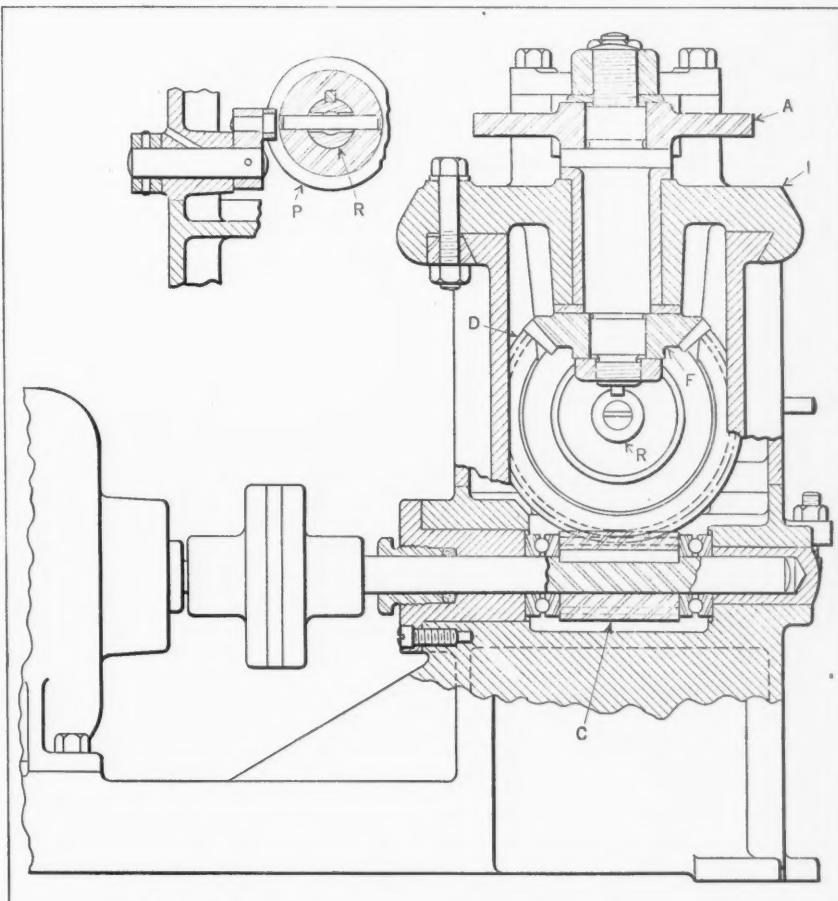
Sectional View of Machine Illustrated in Fig. 1, Showing Master Cam Drive
